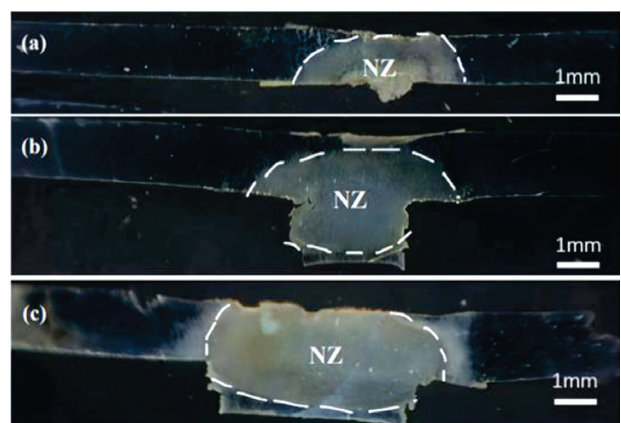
Macroscopic morphology of fusion nuclei under different welding currents: a) 12 kA, b) 14 kA, c) 16 kA
